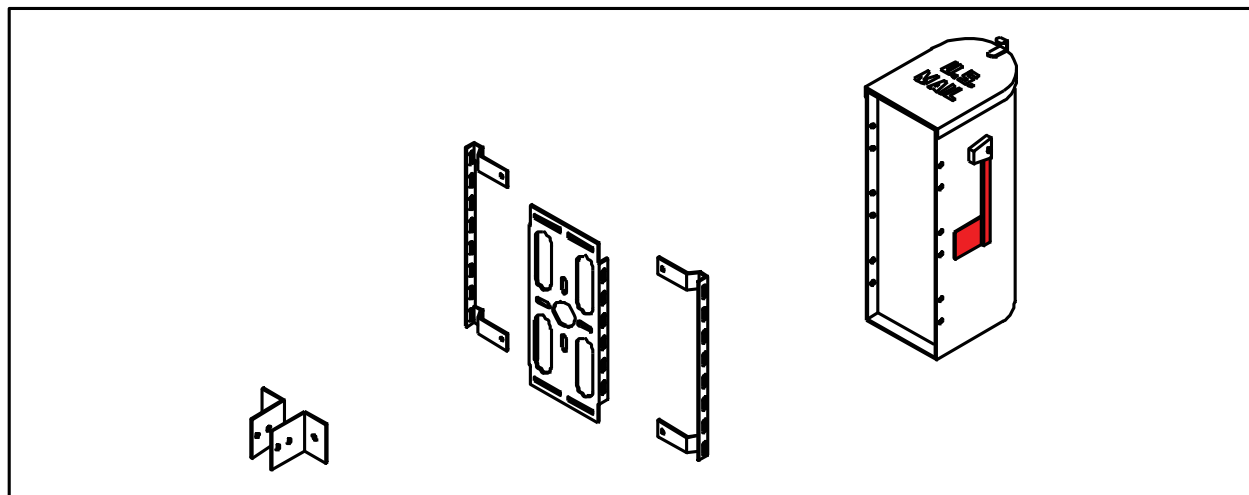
Mailbox Bracket to Mailbox Connection Detail
